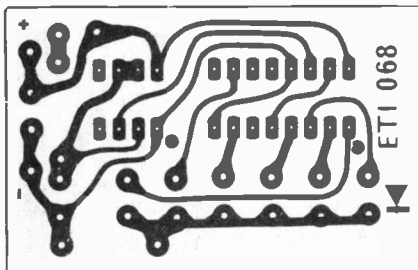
Printed-circuit board layout for the LED dice. Full size 55mm x 35mm.
